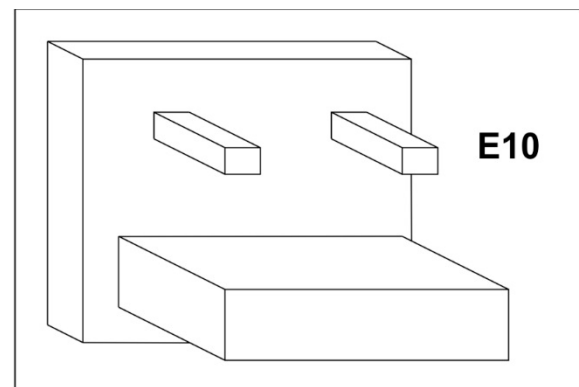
Footswitch Weld Abort Jumper in the ON Position
